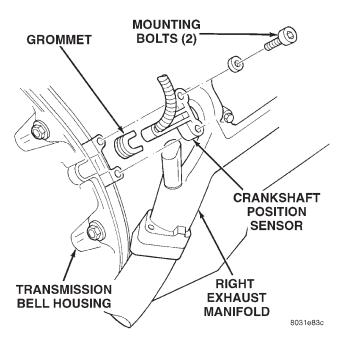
Crankshaft Position Sensor—5.2L Engines
